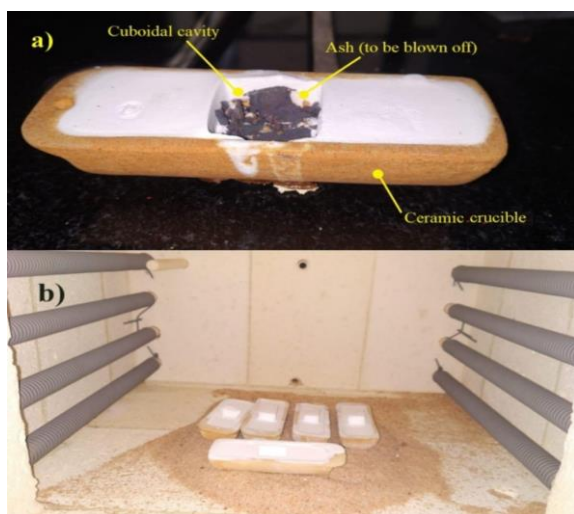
(a) Mould after curing, and (b) Furnace chamber with moulds placed inside for curing
